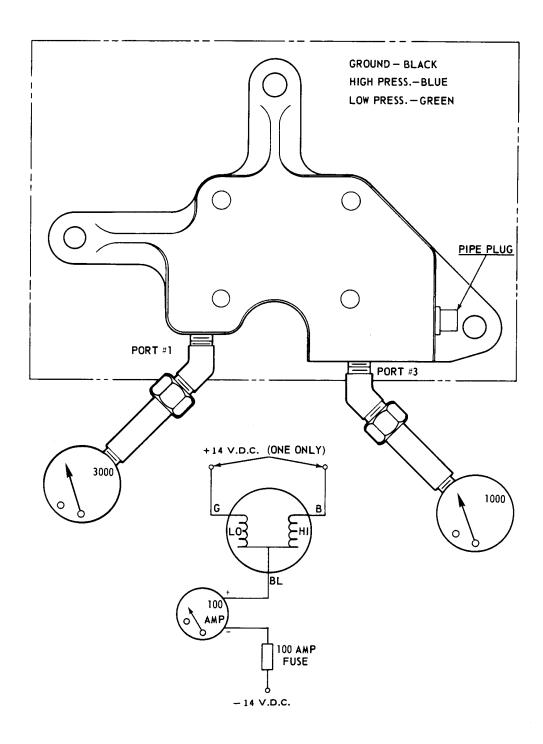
Test and Adjustments of Hydraulic Pump (Prestolite)
